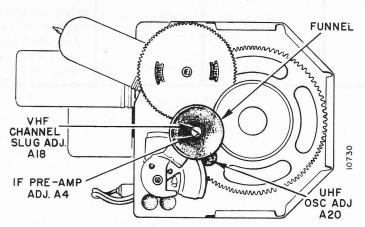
Front View of VHF-UHF Tuner Showing Adjustment Locations.
